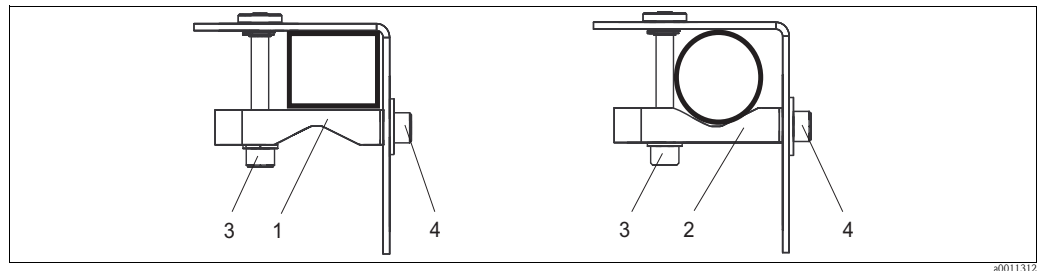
Installing the rail mounting, pendulum holder and immersion tube tray
